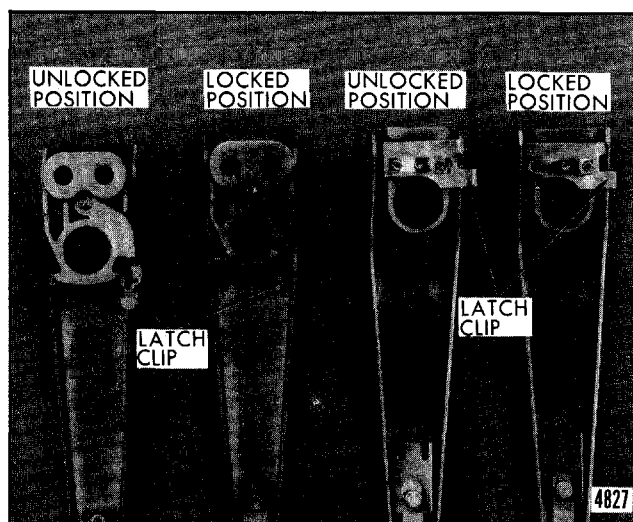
Wiper Arm Latch Clips - "E" Styles
